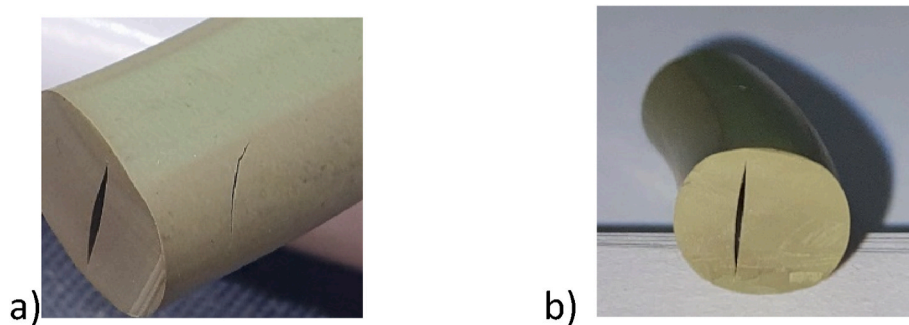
Cracks formed at both ends of the FKM O-ring segment.
